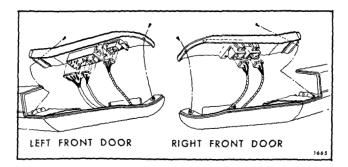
Front Door Arm Rest Switch Cover Assembly
